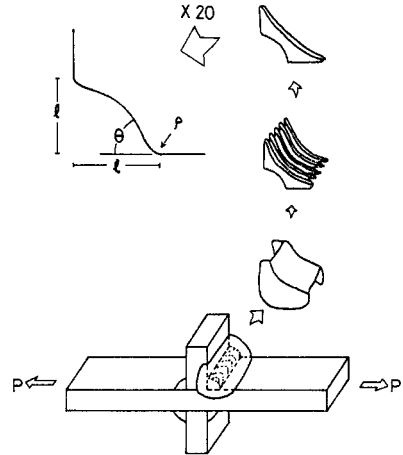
Schematic view of measurement of fillet weld toe profile.
